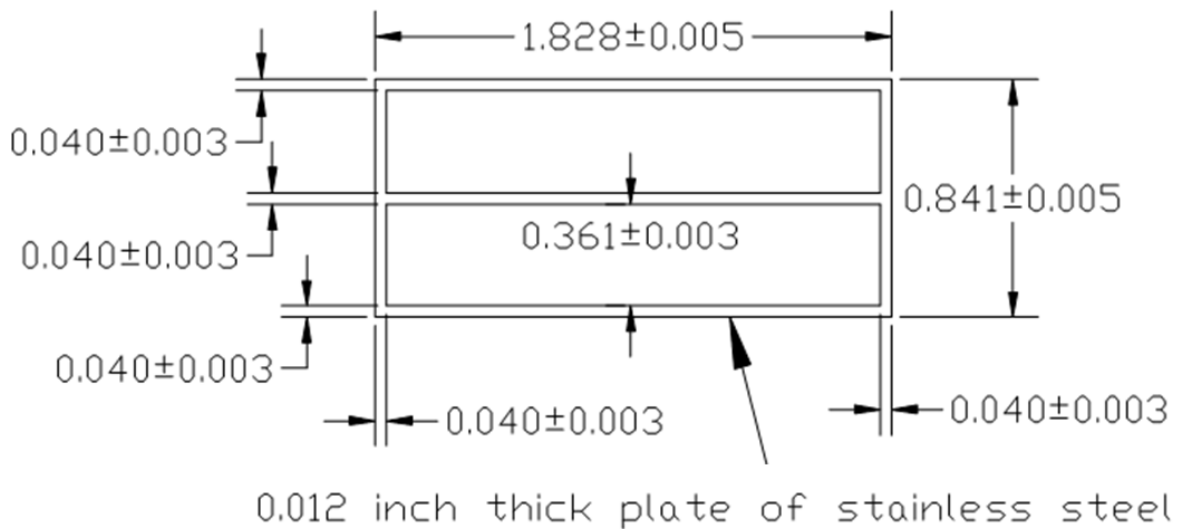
Geometric dimensions of a single spacer for the sub-scale hybrid cryocooler heat exchanger, in inches [23].
